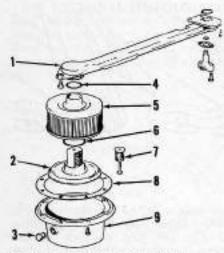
Exploded view of hydrautic pump suction filter and cover used on 1190 and 1290 models. Model 1390 filter assembly is similar.
